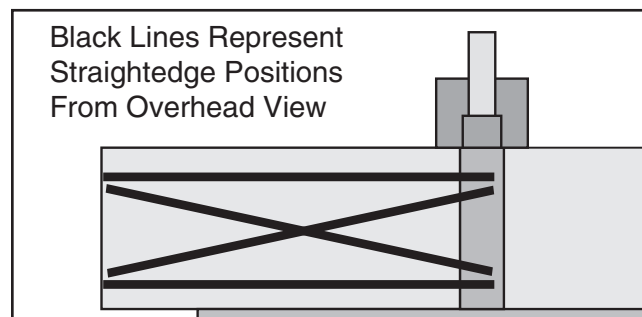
Straightedge positions for verifying if outfeed table is parallel with cutterhead.
